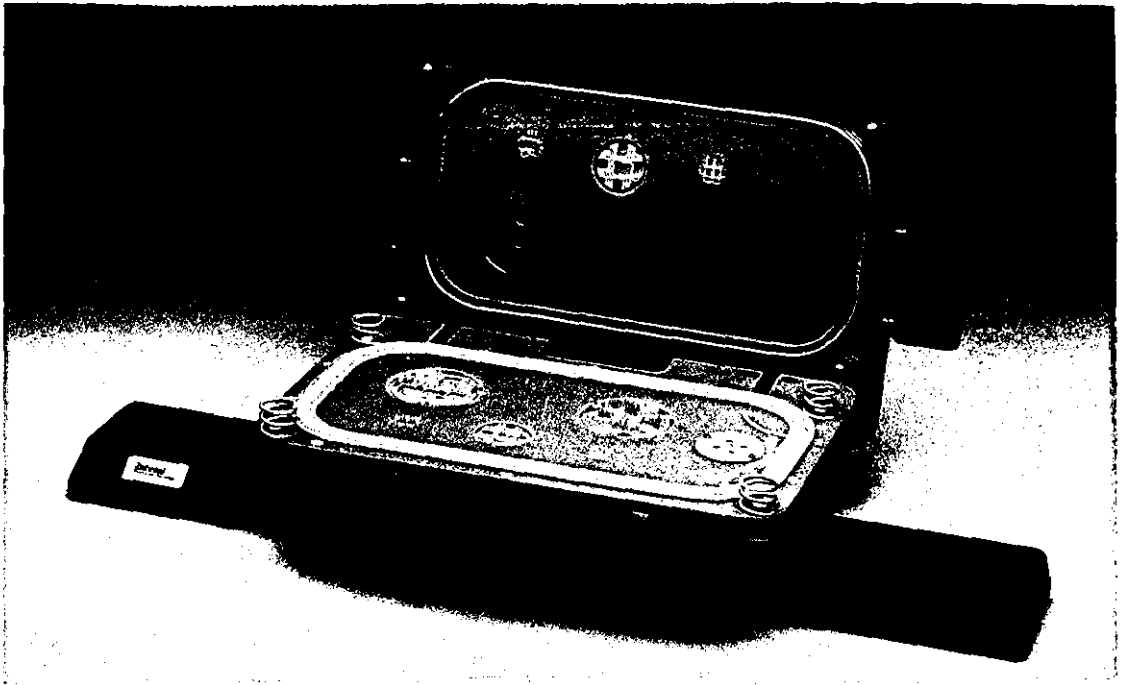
A CLAM SHELL DOUBLE SIDED FIXTURE
